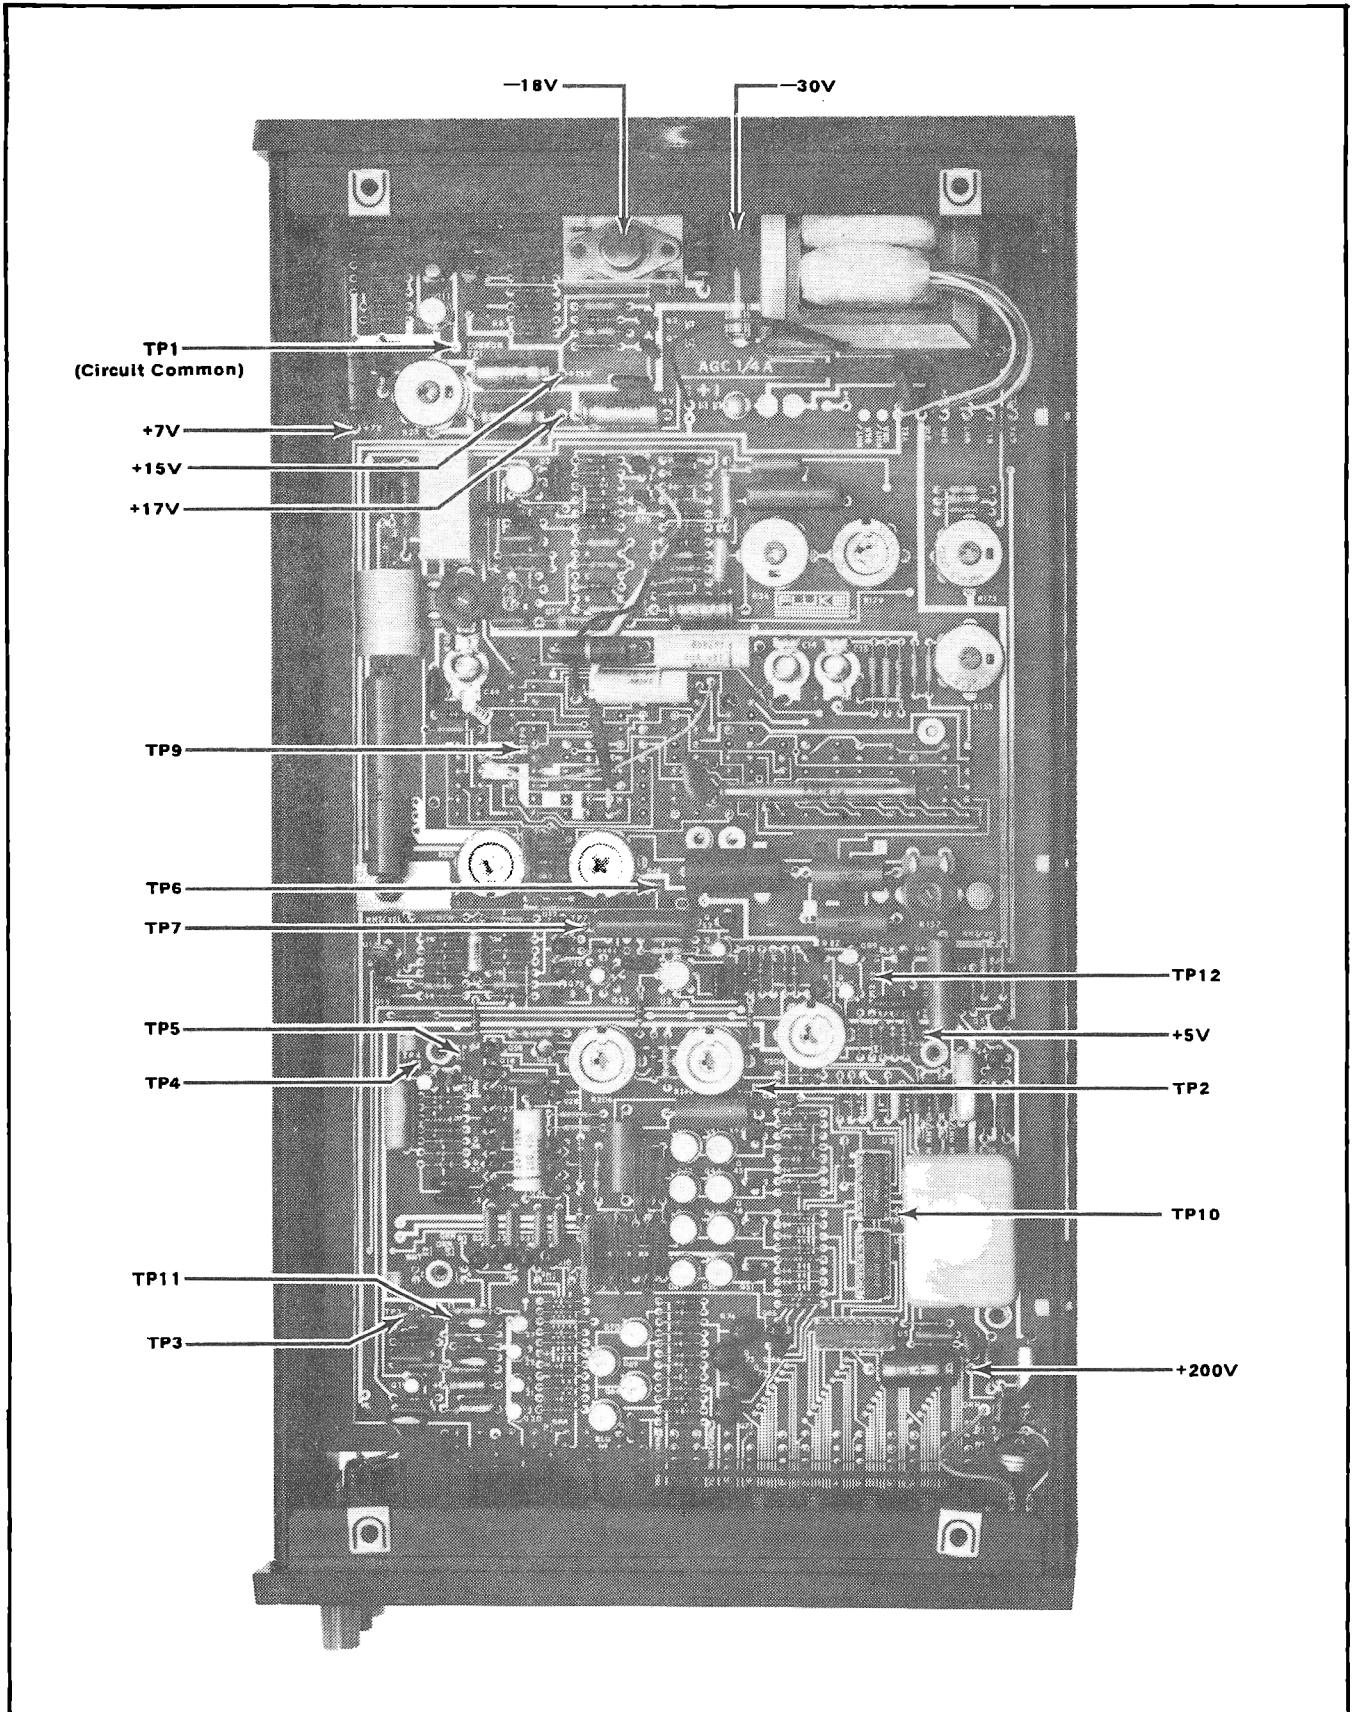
LOCATION OF TEST POINTS ON PCB
